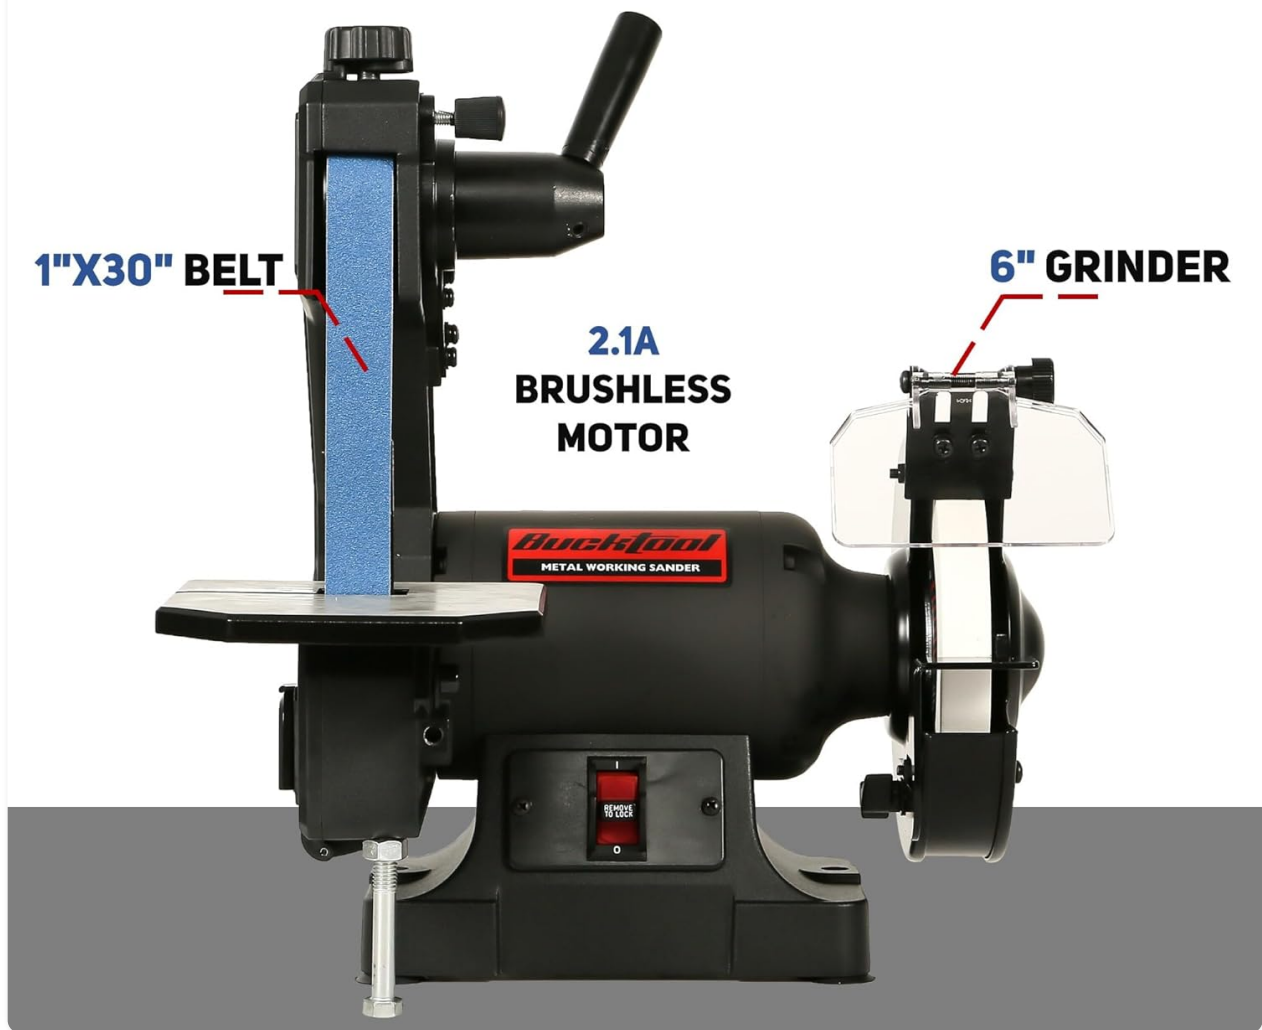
Diagram illustrating the direct drive belt grinder with 1"x30" belt and 6" grinder.
